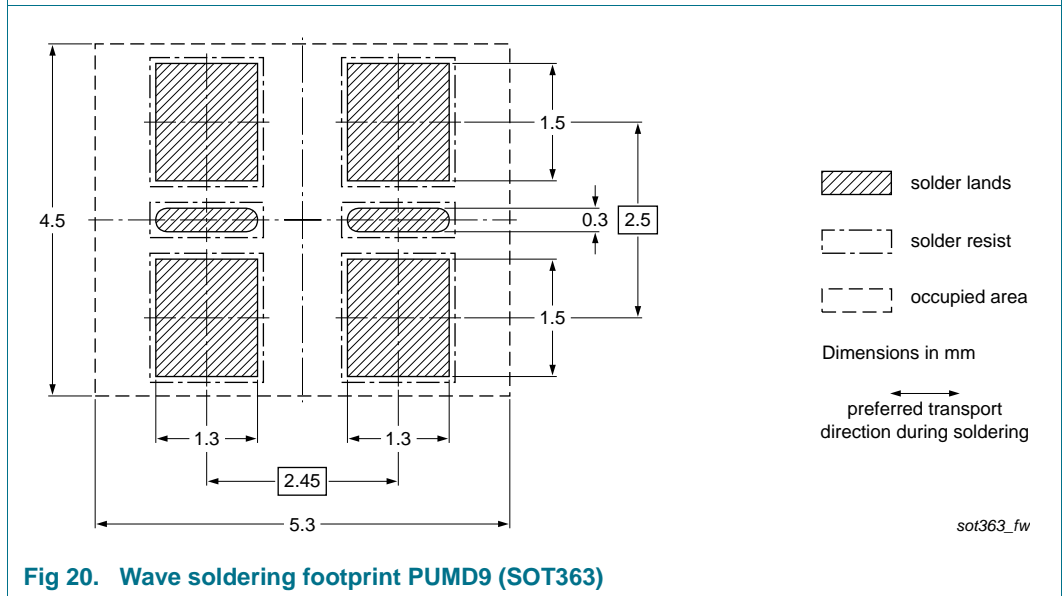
Wave soldering footprint PUMD9 (SOT363)
